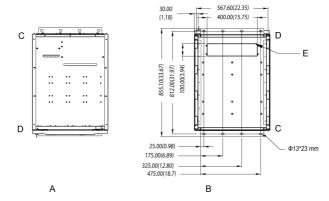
UPS cabinet dimensions 100-120 kVA (top and bottom views)
